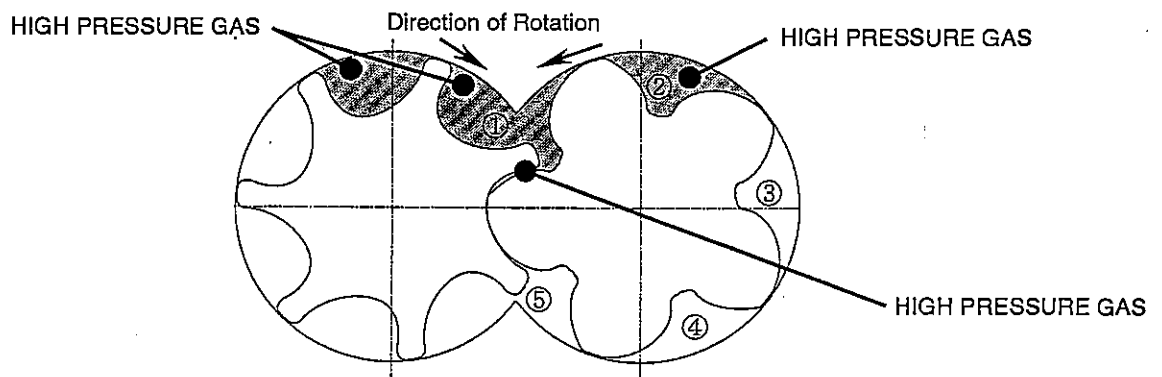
Rotor profile of KOBELCO COMPRESSOR
